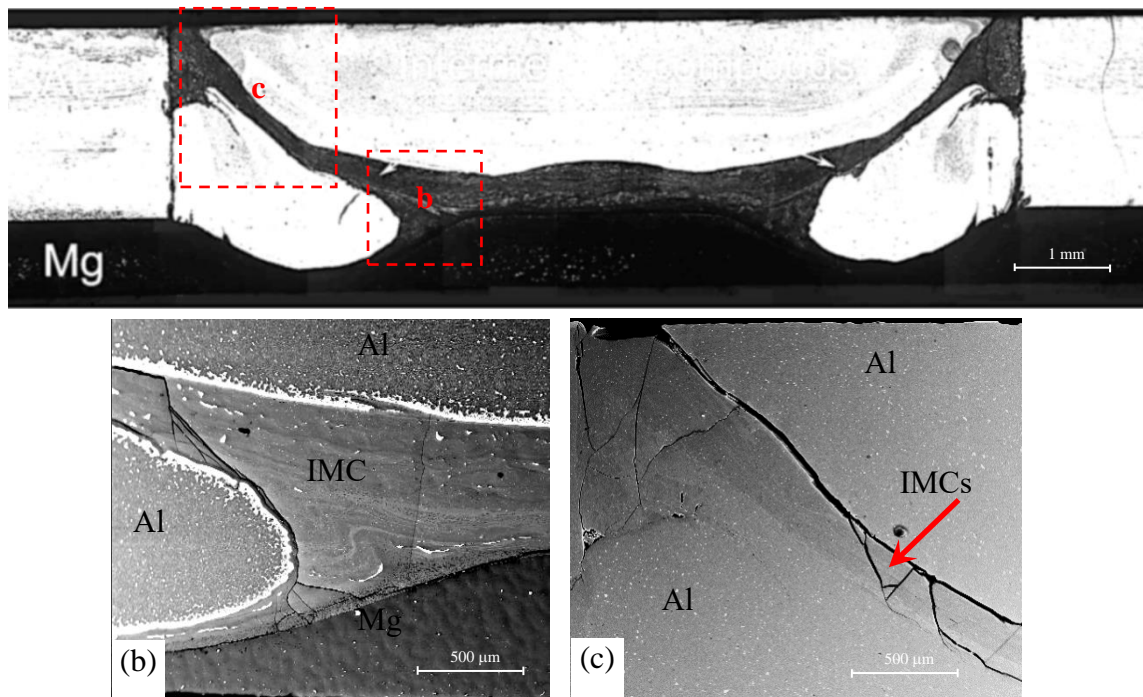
Macrostructure of a cross-section of an early RFSSW dissimilar Al to Mg joint produced with a 2.0 mm thick Al upper sheet, using a 2500 rpm tool rotation rate and 2.5 s welding time; (b) the thick IMC layer formed at the joint interface; and (c) example of cracks propagated through the IMC layer.
